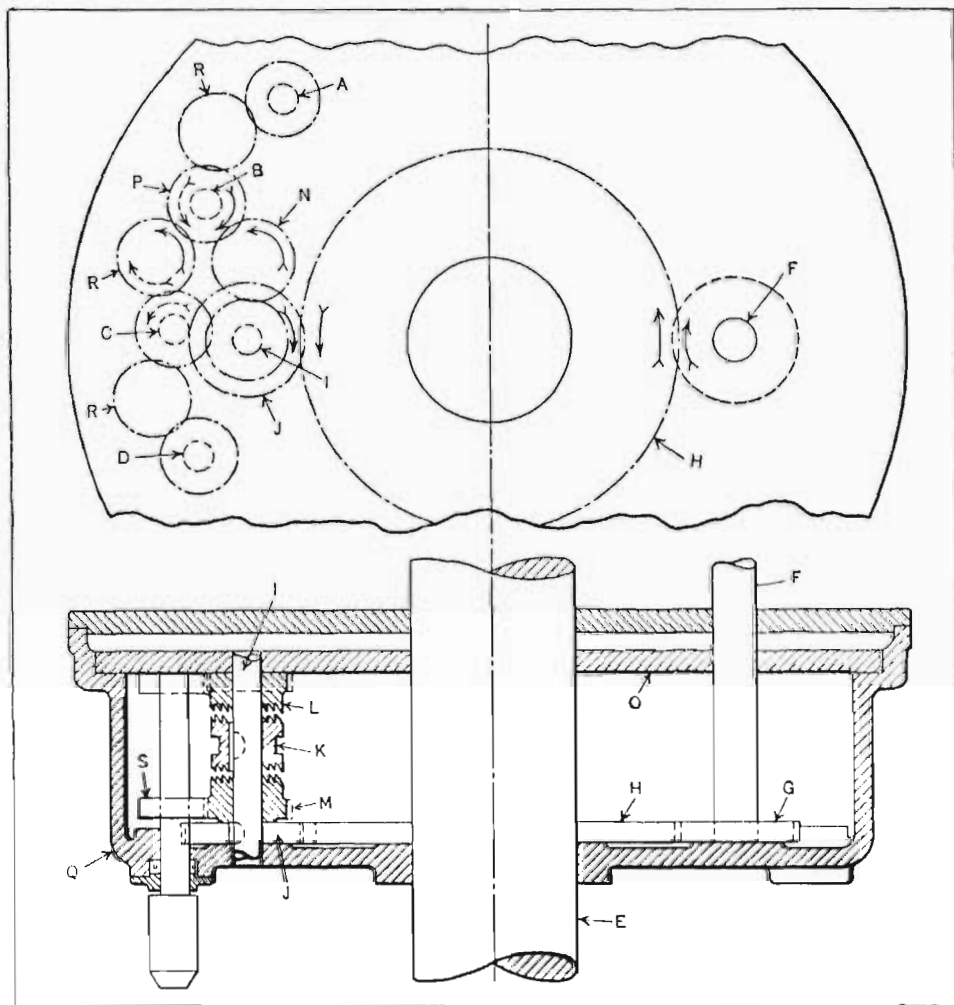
Reversing Mechanism for Taps Used in Multiple-spindle Drill Head
